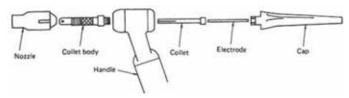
Schematic Showing Exploded View of Key Components Comprising a Gtaw Manual Torch
